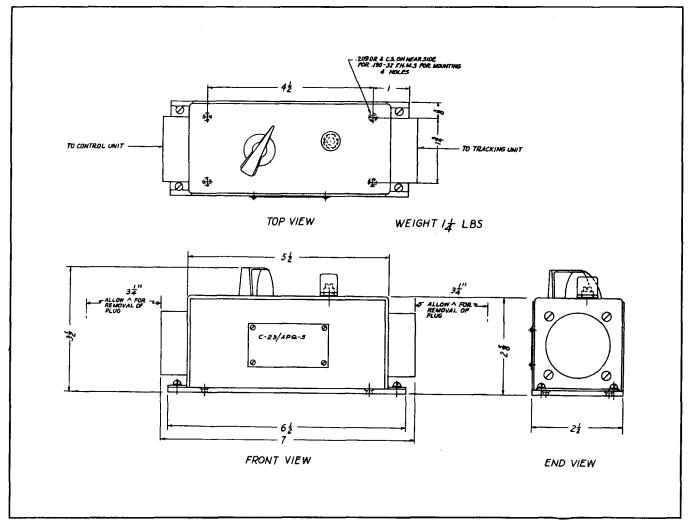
Control Box C-23/APQ-5—Outline Dimensions
